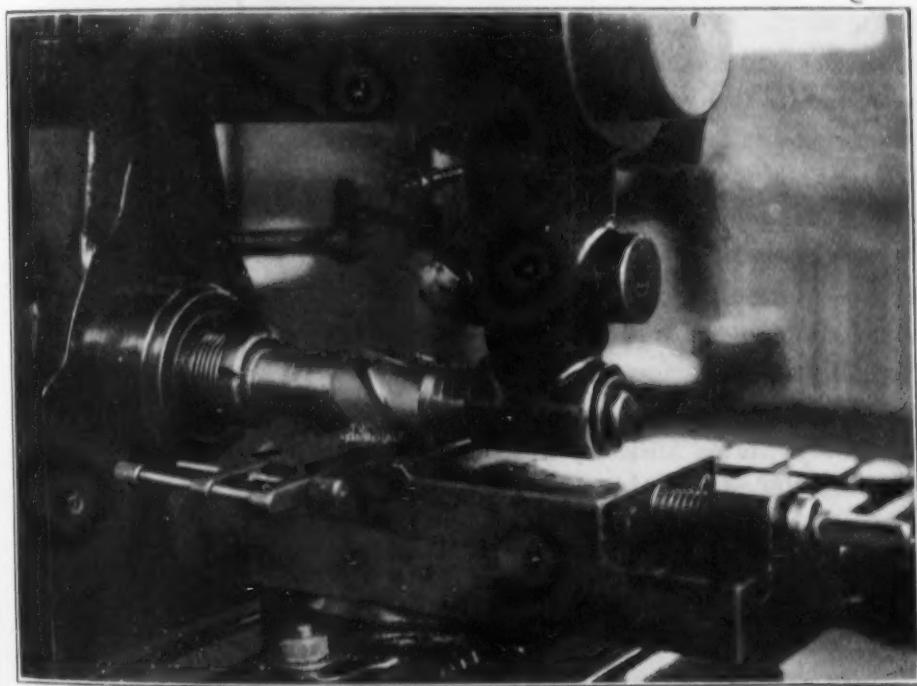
Set of Sheet Tensile Test Specimens being Machined in Milling Machine with Special Cutter. Method of Clamping is Shown in the Photograph.
